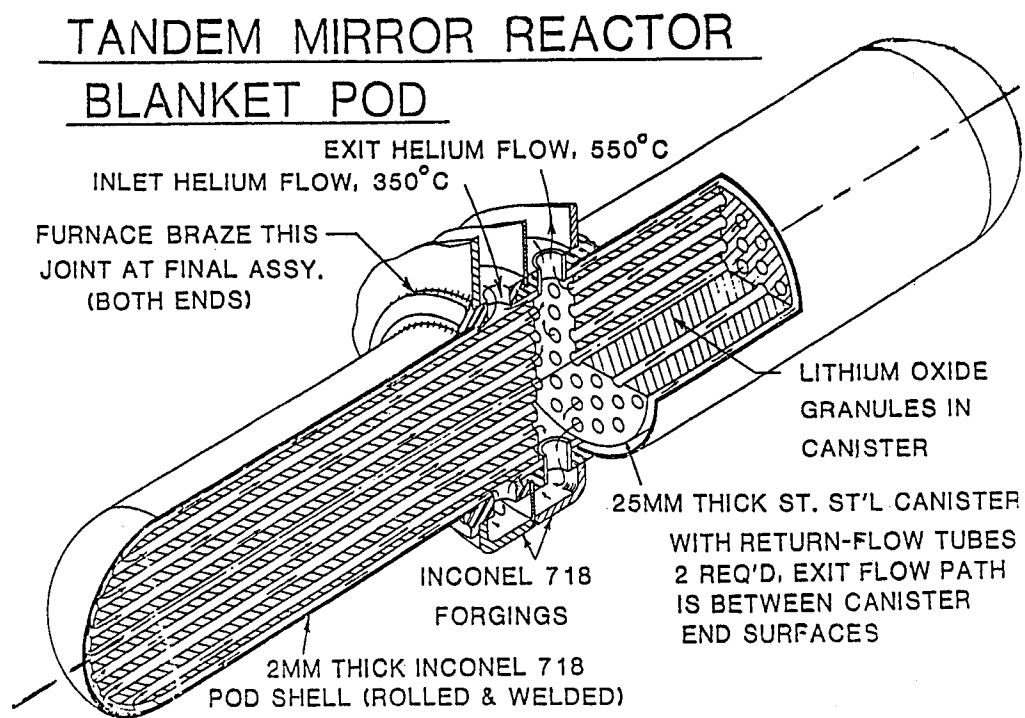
Cylindrical blanket module for a tandem mirror reactor [204].
